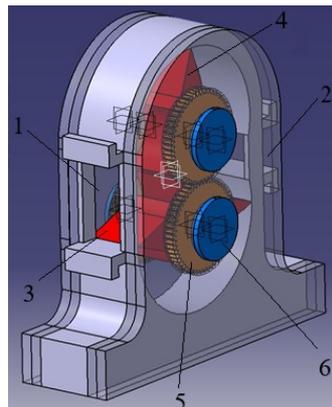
Axonometric view of the volumetric rotating machine model with profiled rotors
